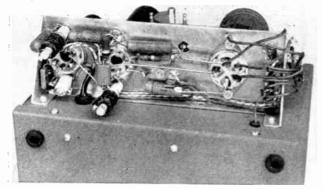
Wiring underneath the shelf. The loose flexible leads at the right are anchored to a lug strip on the chassis after assembly.
